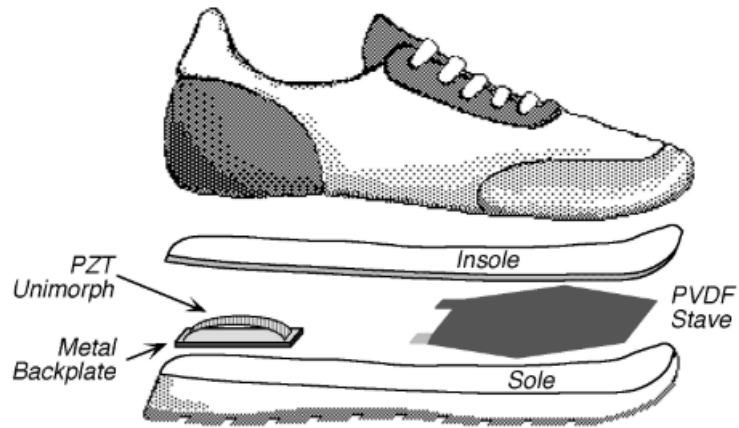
Exploded view showing the integration of the piezoelectric material [28]
